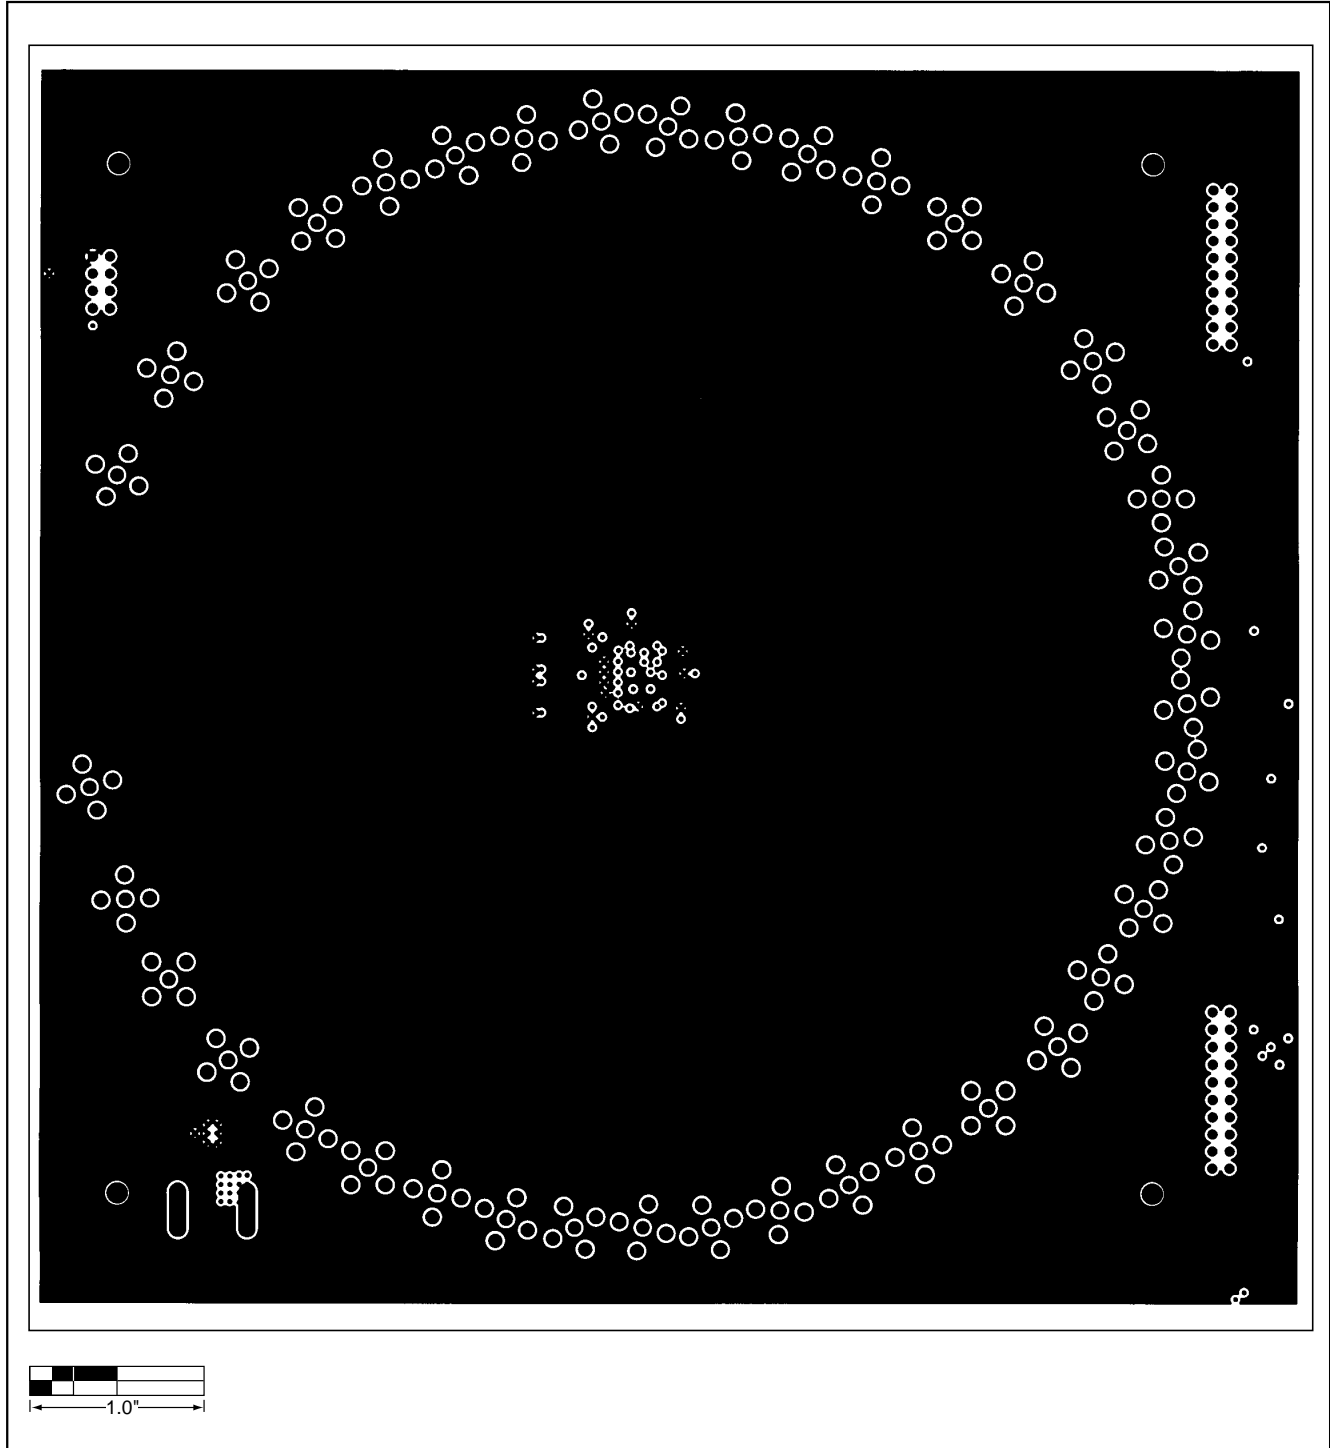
MAX3885 EV Kit PC Board Layout—Power Plane
